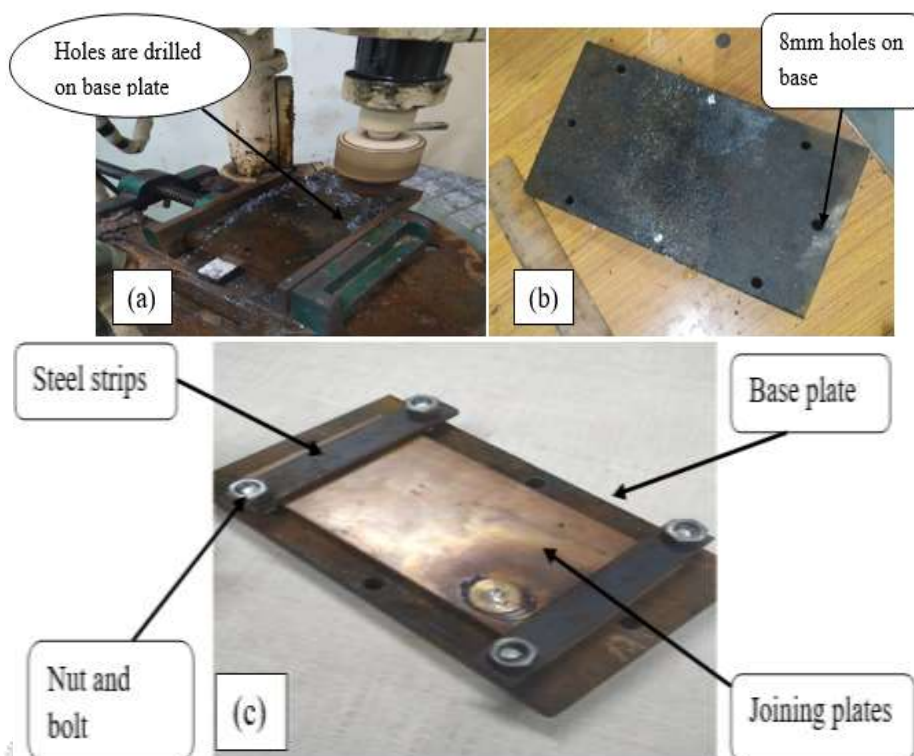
(a) Drilling on the base material, (b) Drilled base (c) Complete fixture
